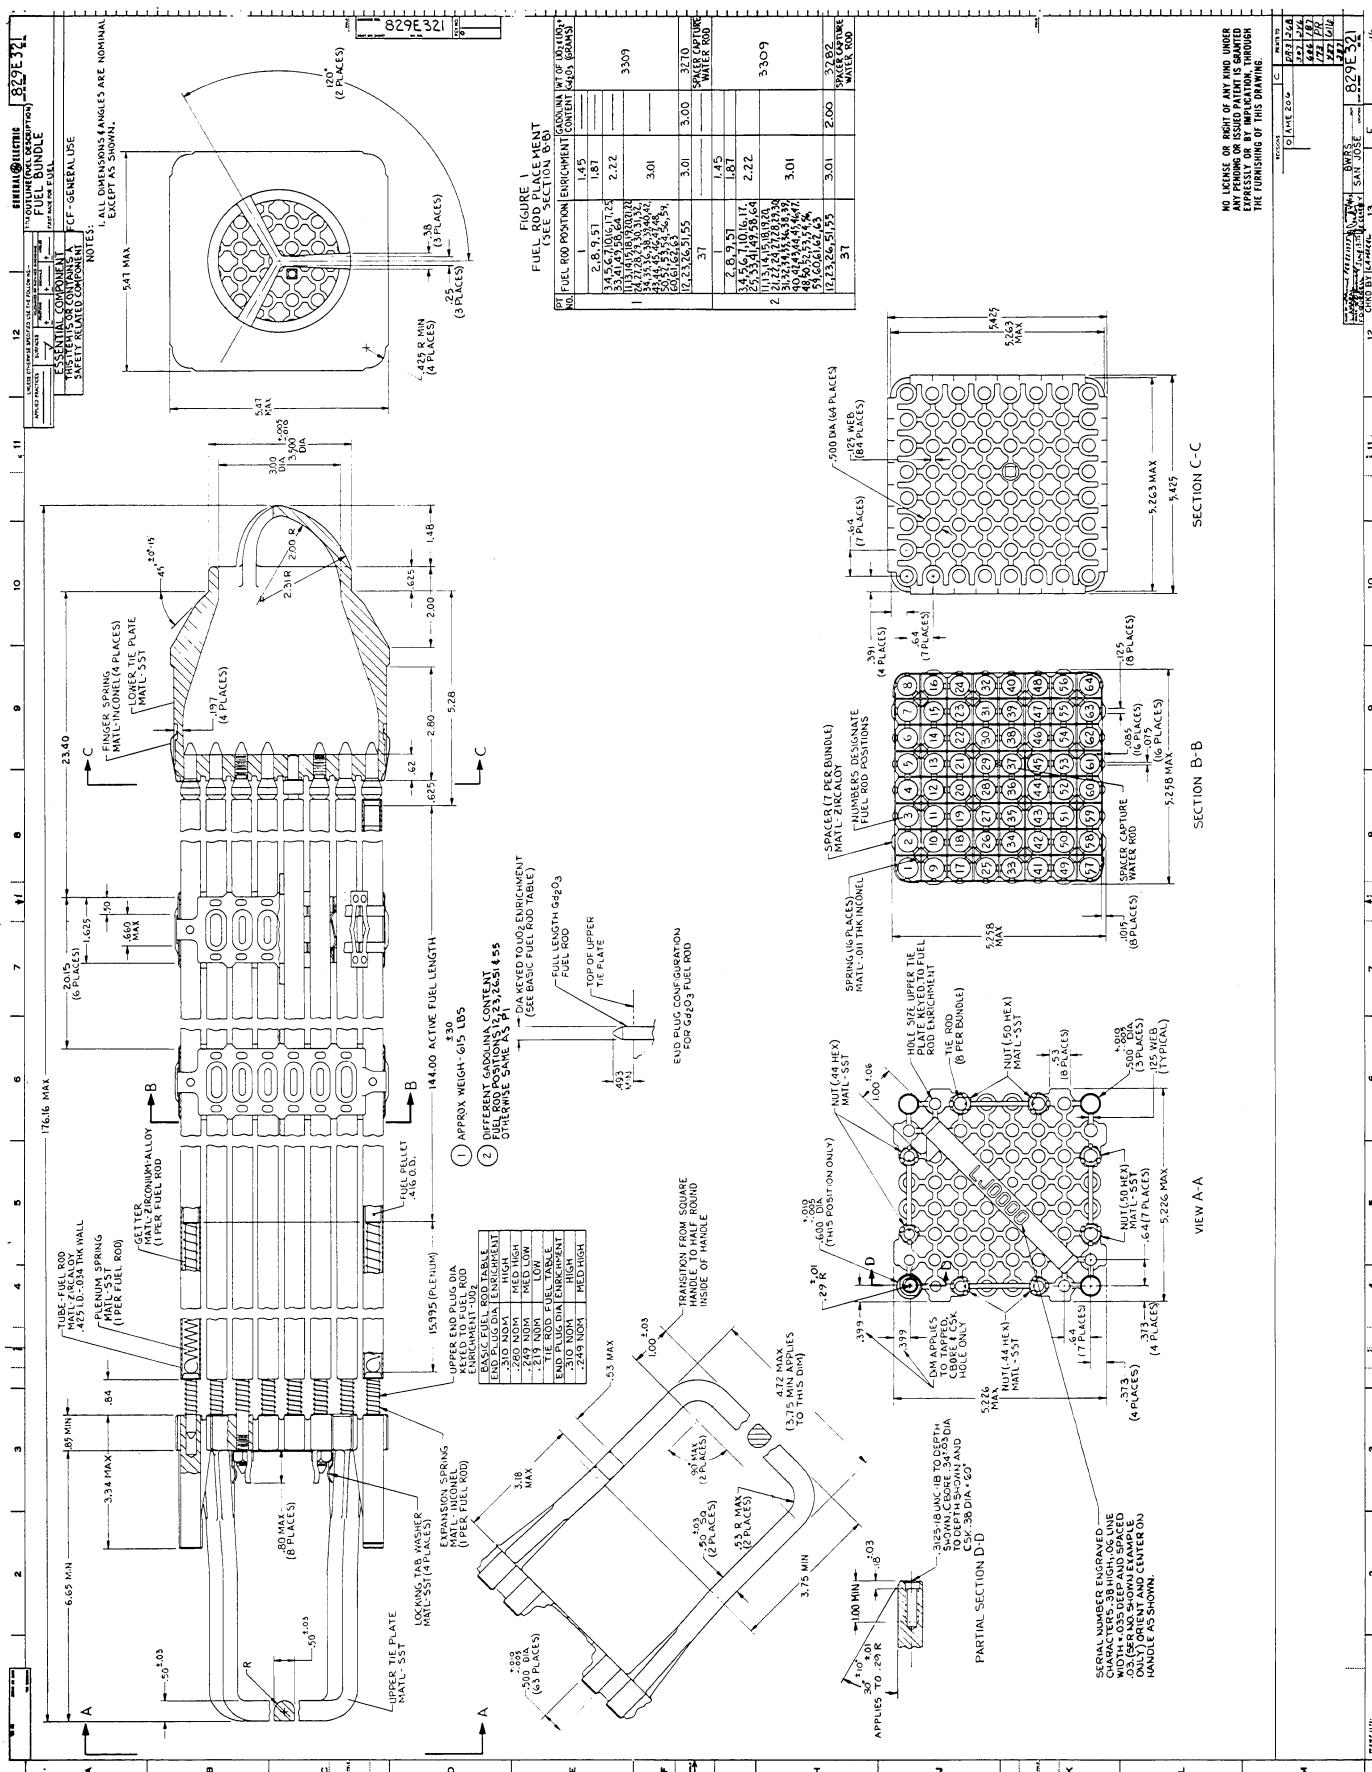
Fuel Assembly Drawing for 8x8 Reload Fuel
